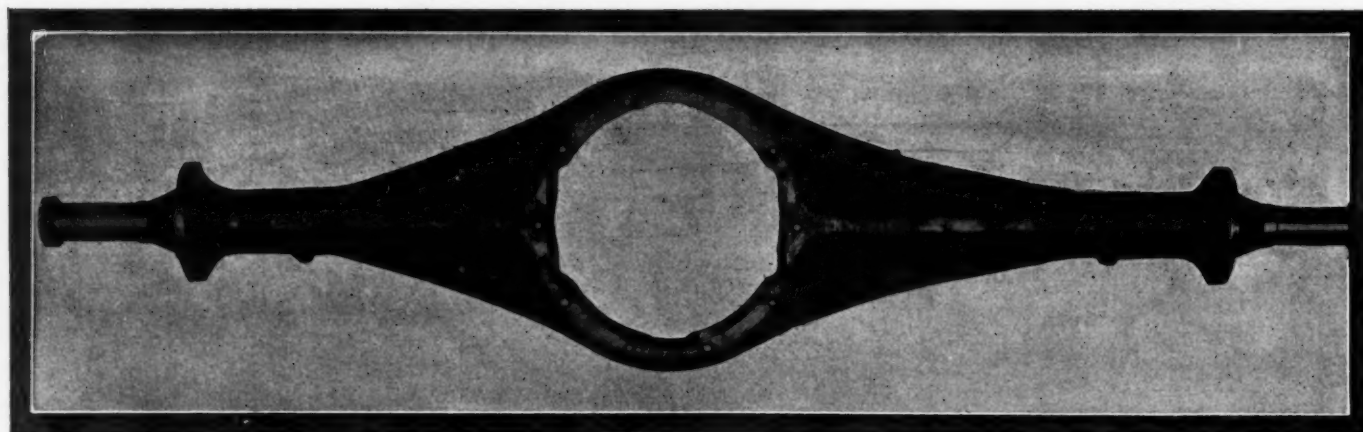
Rear view of the pressed steel axle housing with the bevel drive and differential set removed
